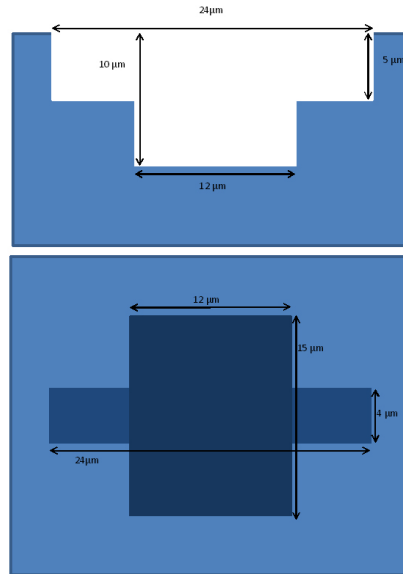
A schematic figure of the FIB-machined sample holder. The top image is a side-view cross-section while the bottom image is top-view.
